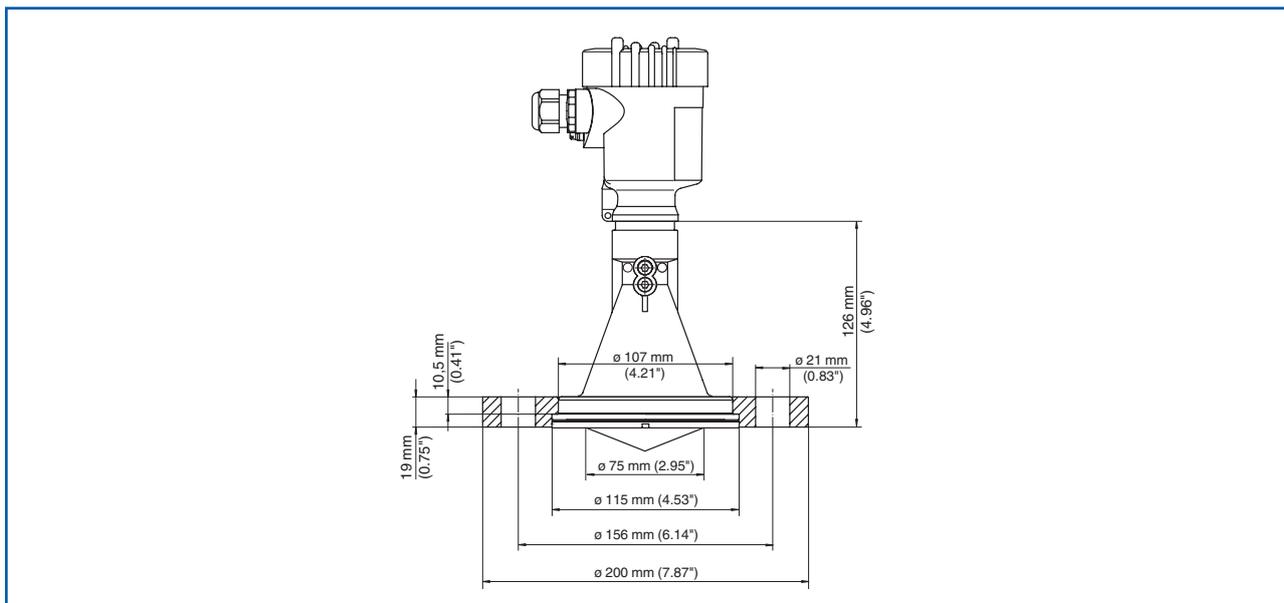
Nico 15, collar flange to match DN 80 PN 16 / ASME 3" 150lbs/JIS80 10K
